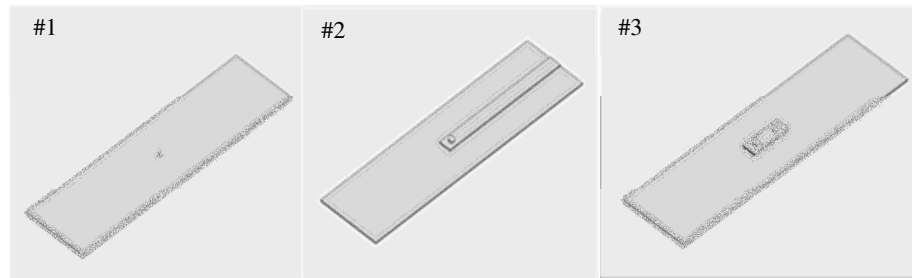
Three types of test specimens: Plate with a center drilled 4 mm hole #1, plate with a one point riveted aluminum strip #2 and plate with a two point riveted symmetrically placed aluminum patch #3
